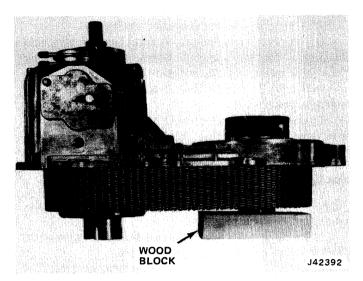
Transfer Case Cover Positioned for Disassembly
